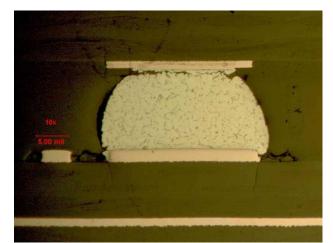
Cross-Section of a wbPBGA Solder Joint Failure for Unit 3 on Board 3, for Leg 13
